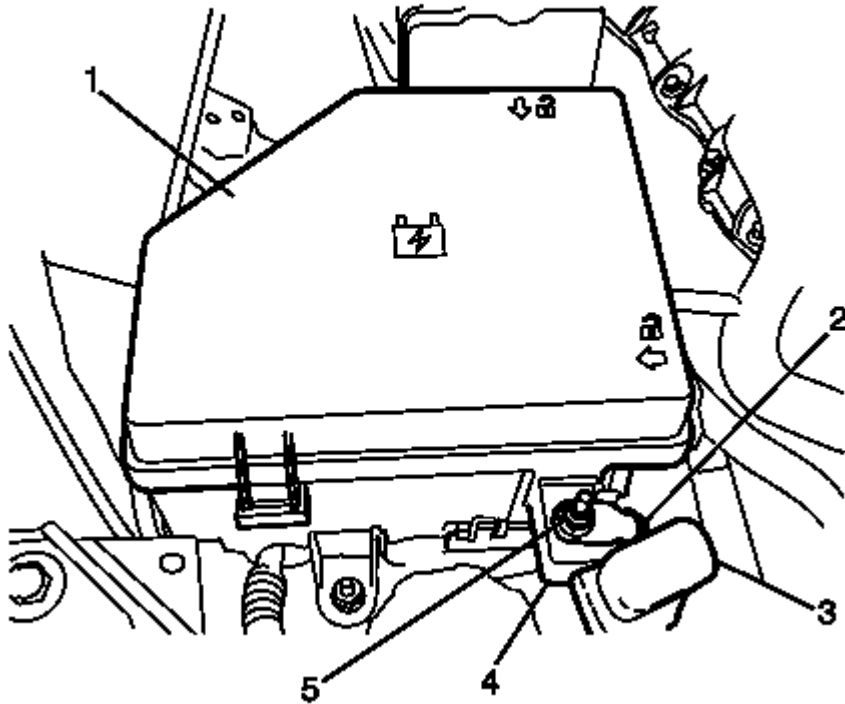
Identifying Positive Cable To Under Hood BEC Plate Retaining Bolt
